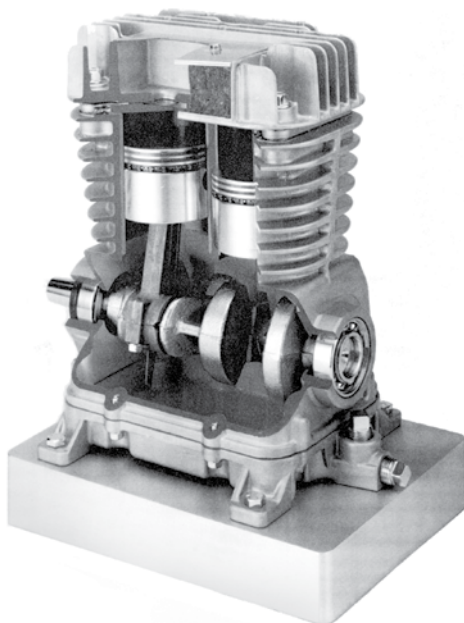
Two Cylinder Single-Acting Reciprocating Compressor
